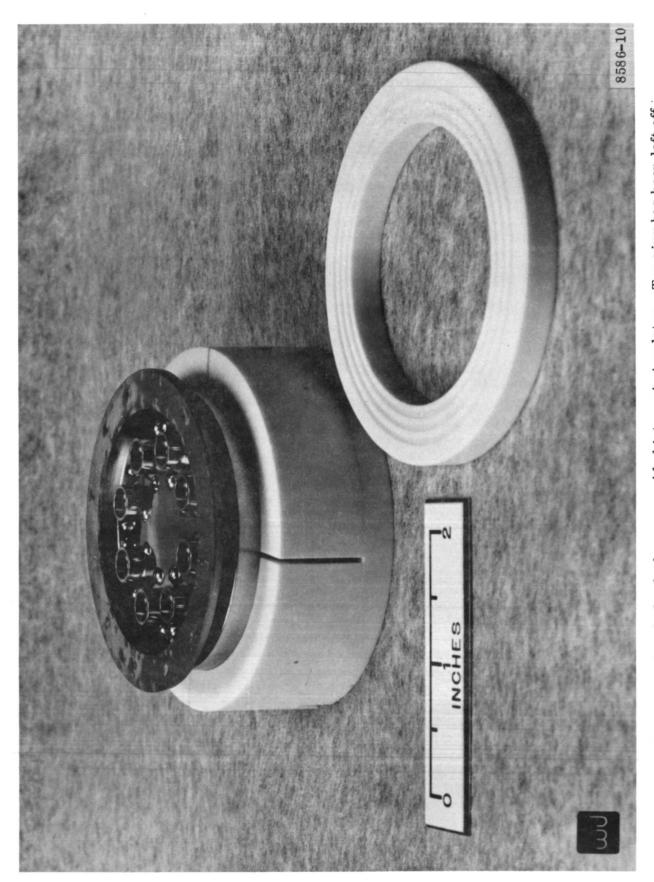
View of bearing and cathode platform assembled into main insulator. Top ring has been left off.
